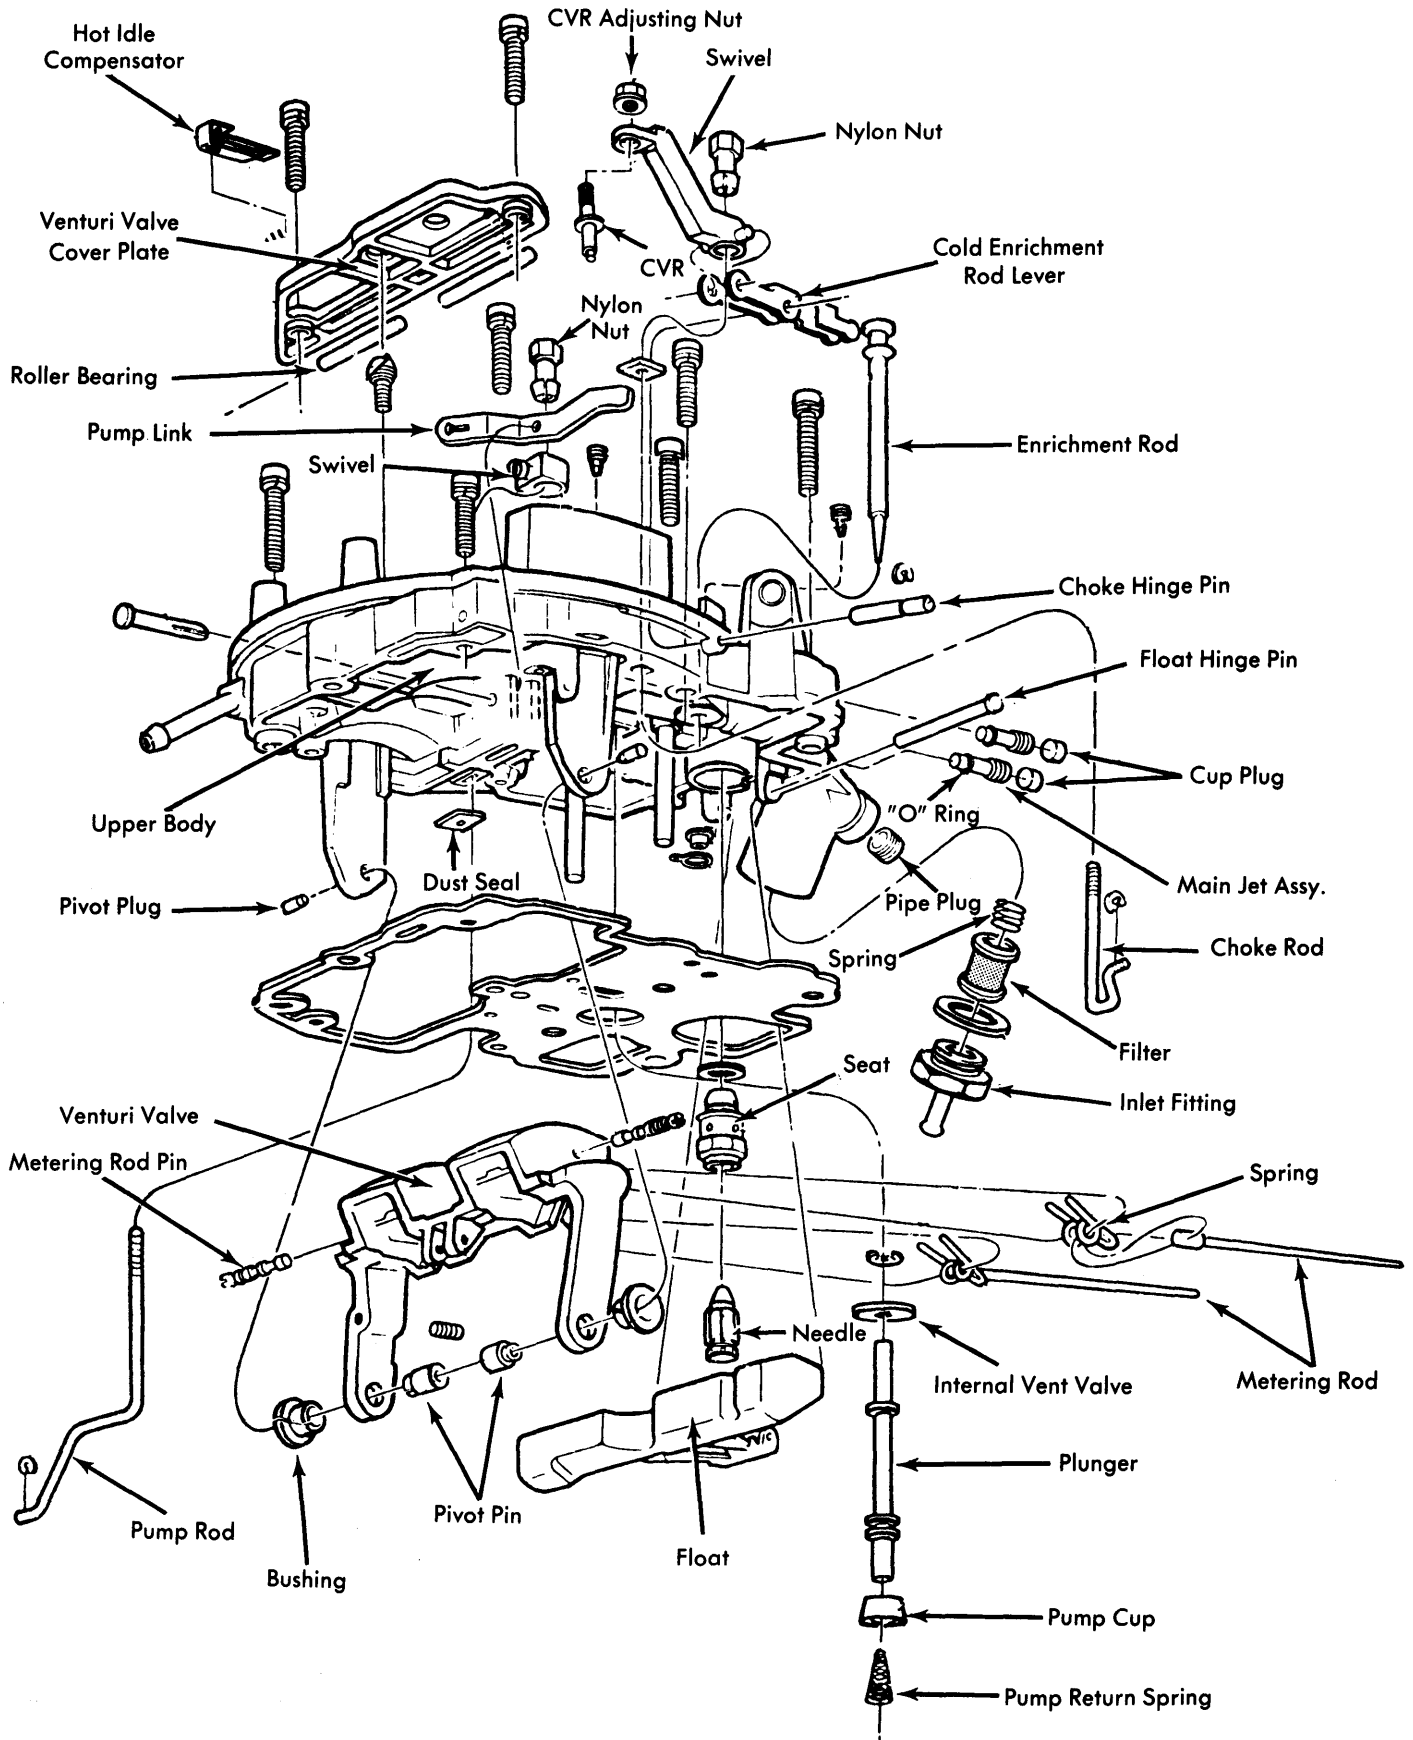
Exploded View of Model 2700 and 7200 Carburetor Upper Body
